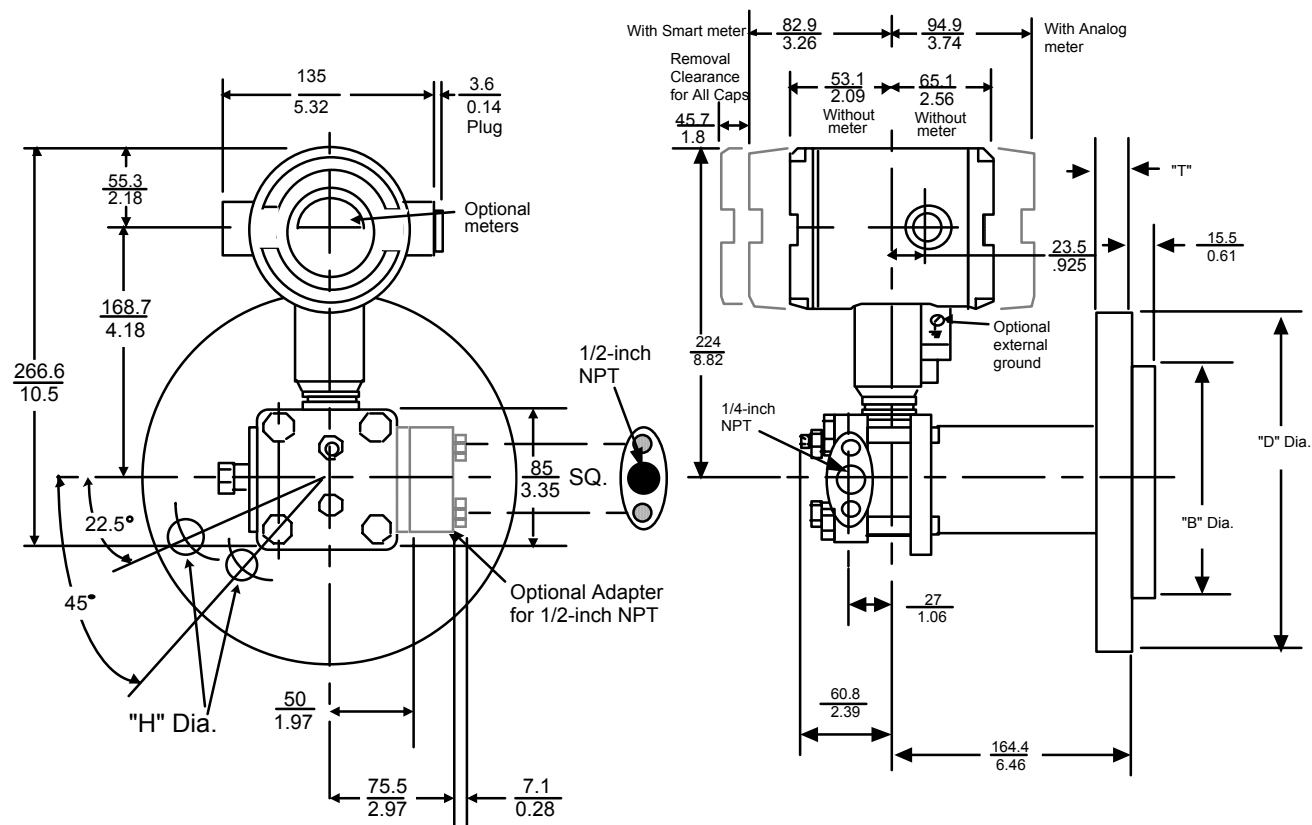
Typical mounting arrangement for flange mounted liquid level transmitter
